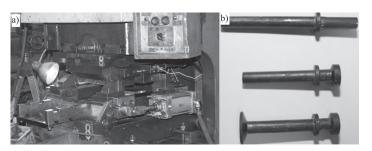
Stand for forging carrying handles: a) TR device, c) final product with erforms
